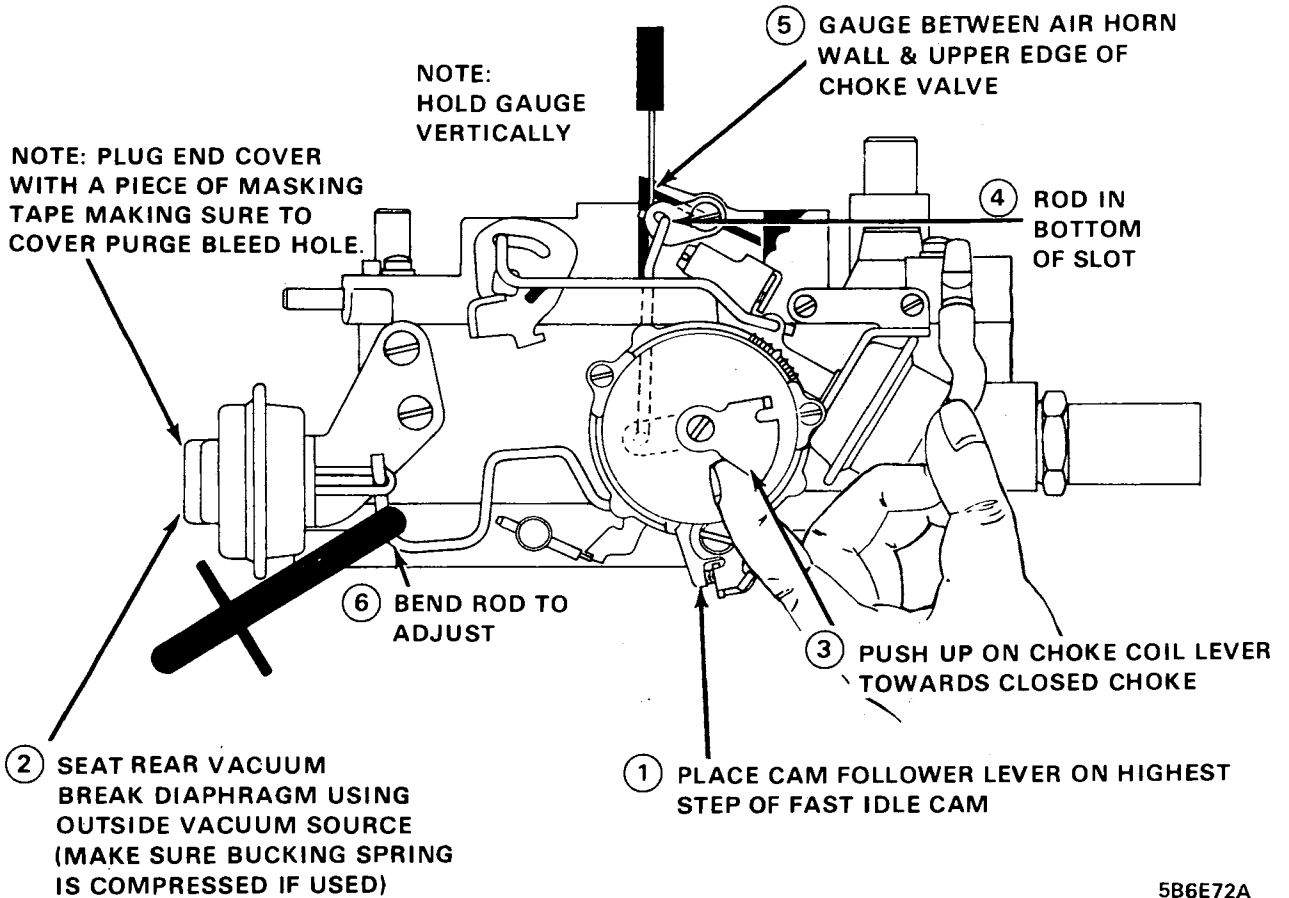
E-72A - Rear Vacuum Break Adjustment - 400-4Bbl. Only
